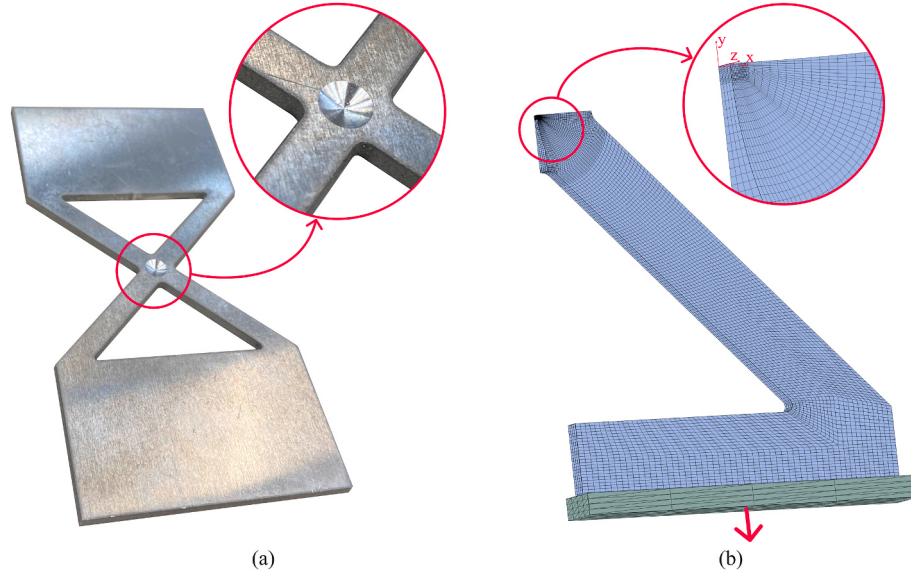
The diagonal-cruciform sheet test specimen: (a) photograph and (b) finite element model with details of the center regions.
